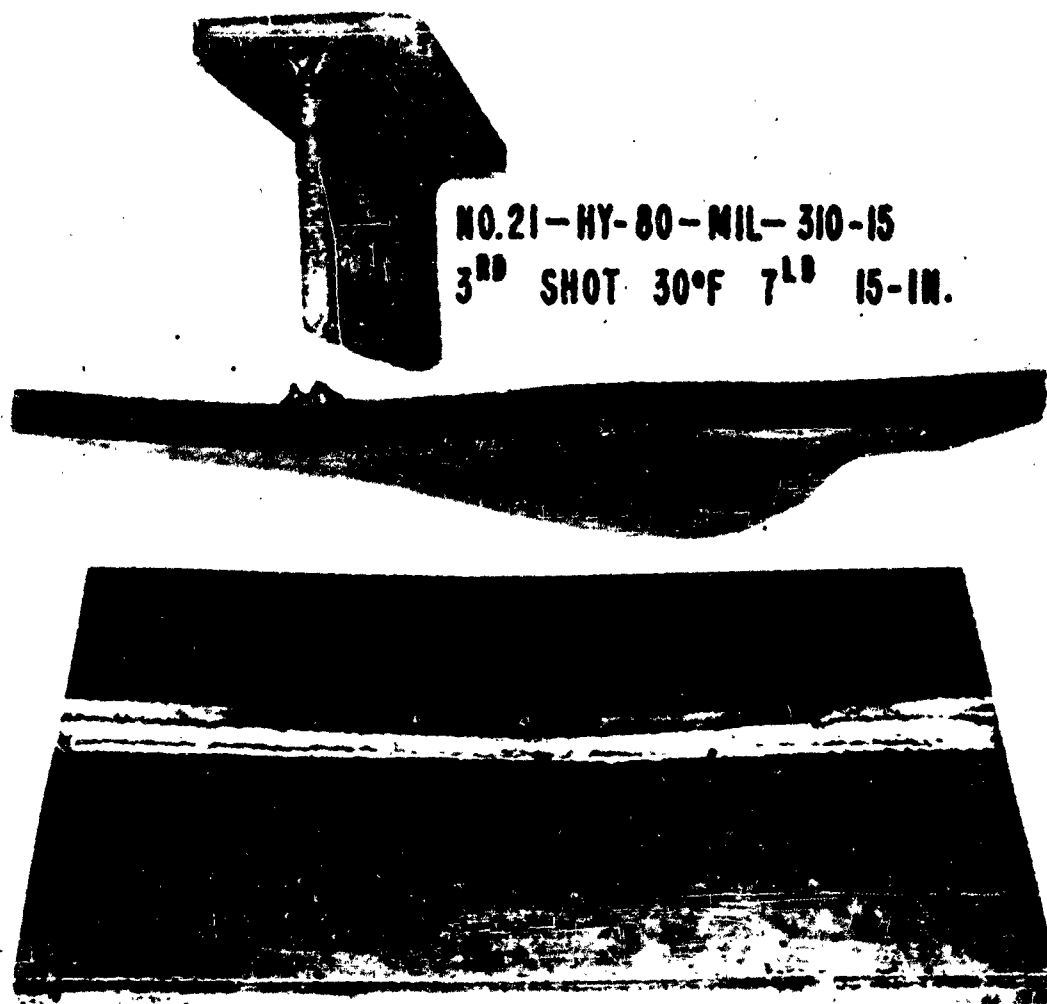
Test specimen No. 21 after three explosive shots showing complete fusion-line separation of web section.
